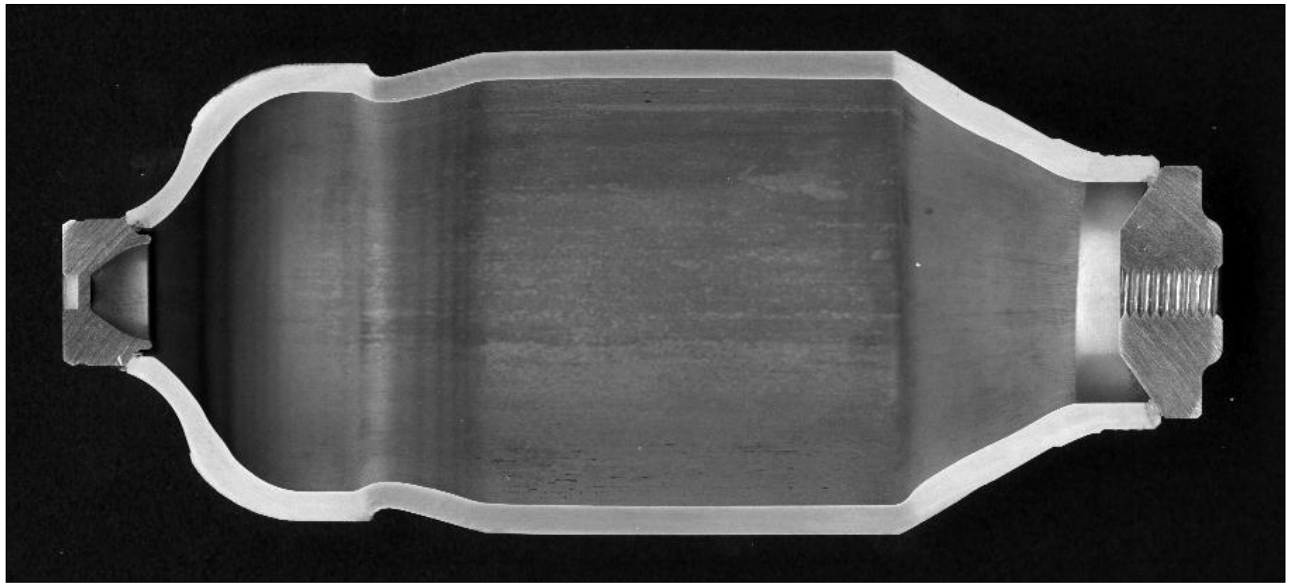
transformed cold gas cylinder with welded plug (right) and welded support of the membrane (left).
